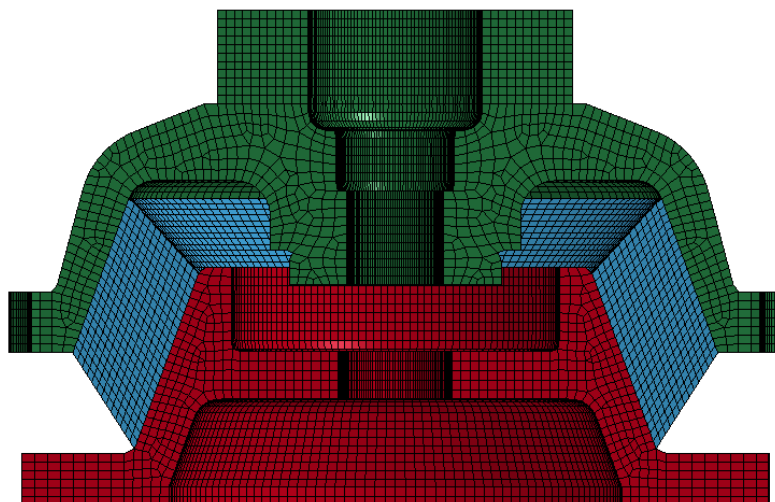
Cross-section of the conical resilient mount assembly mesh
